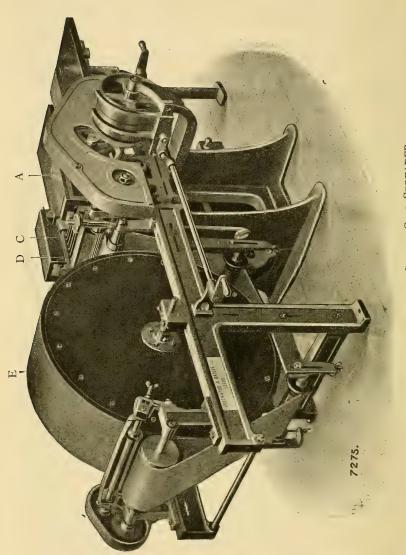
INTERSECTING SCREW GILL SPREADER.
